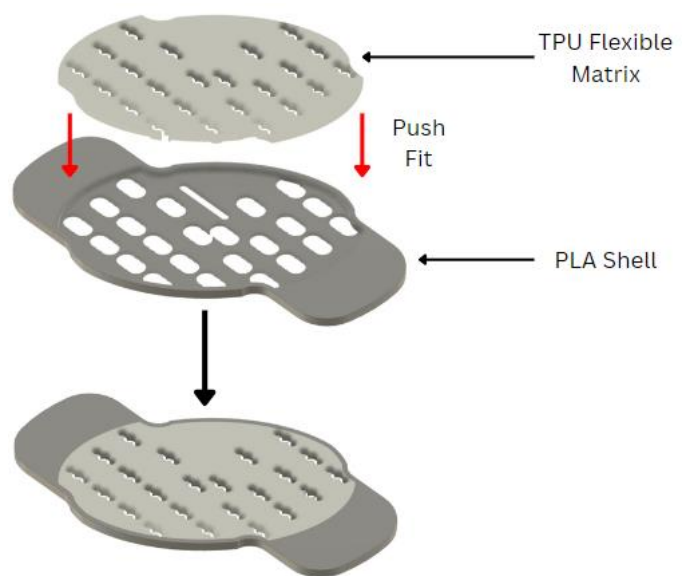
Creation of the locking mechanism mould using TPU for small batch production
